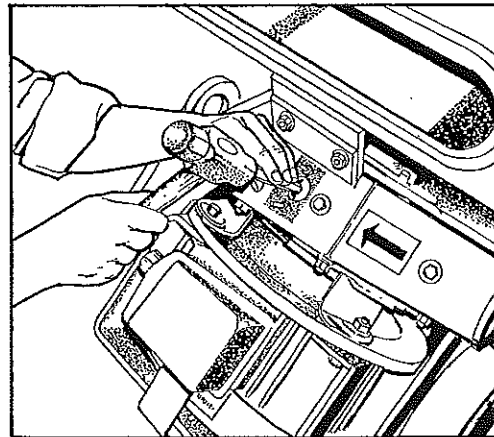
Drive Wheel Blade into Center of Wheel. Remove Blade.
